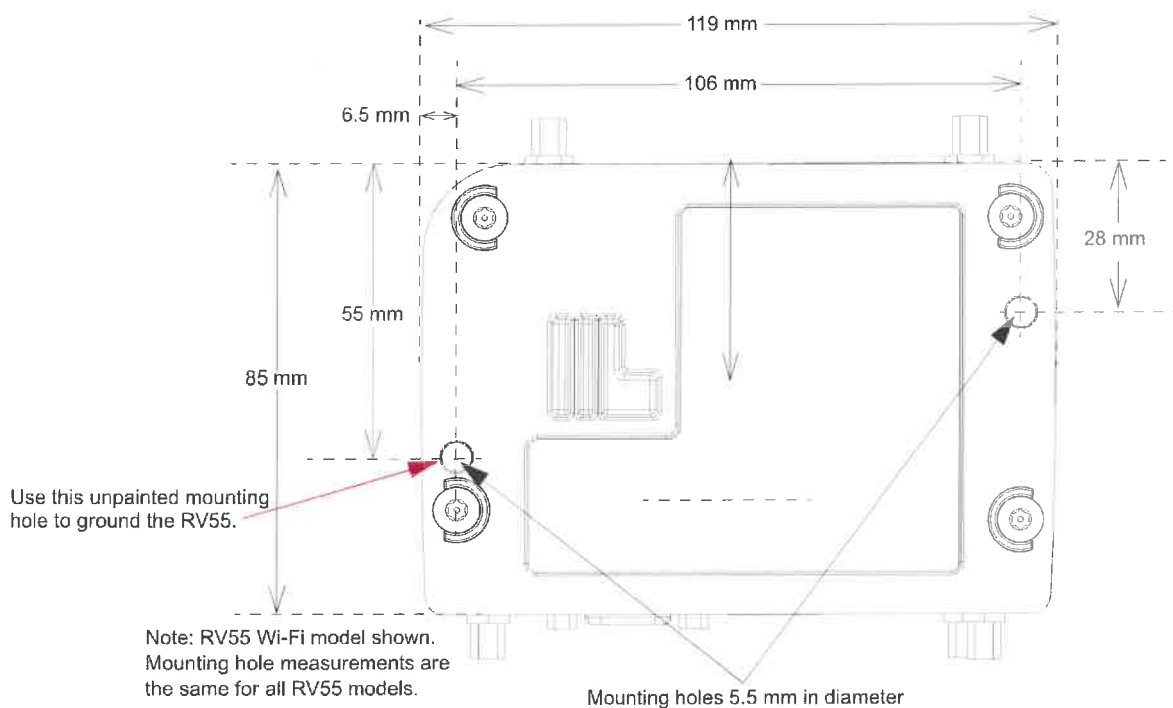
RV55 Router Mounting Hole Locations and Dimensions
